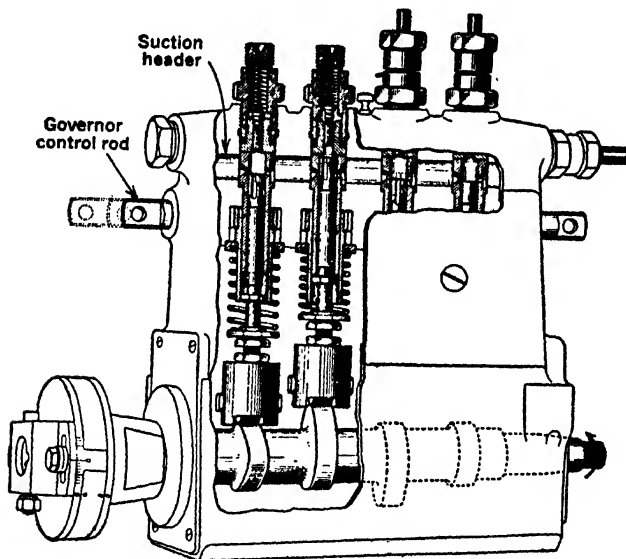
Cutaway drawing of Bosch quadruple pump showing driving mechanism.
